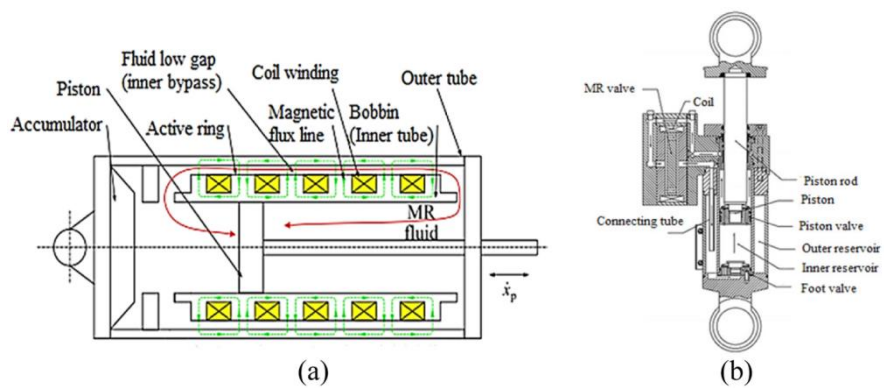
(a) Inner bypass MR damper and (b) MR damper with external bypass.
